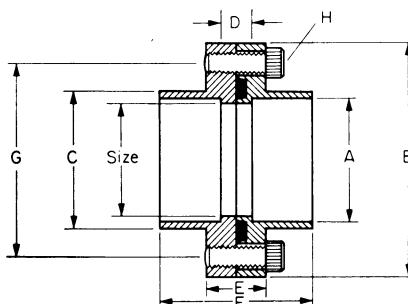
Dimensions of flanges for O-ring seals, from Edwards³²⁹ (Table 3.32)
